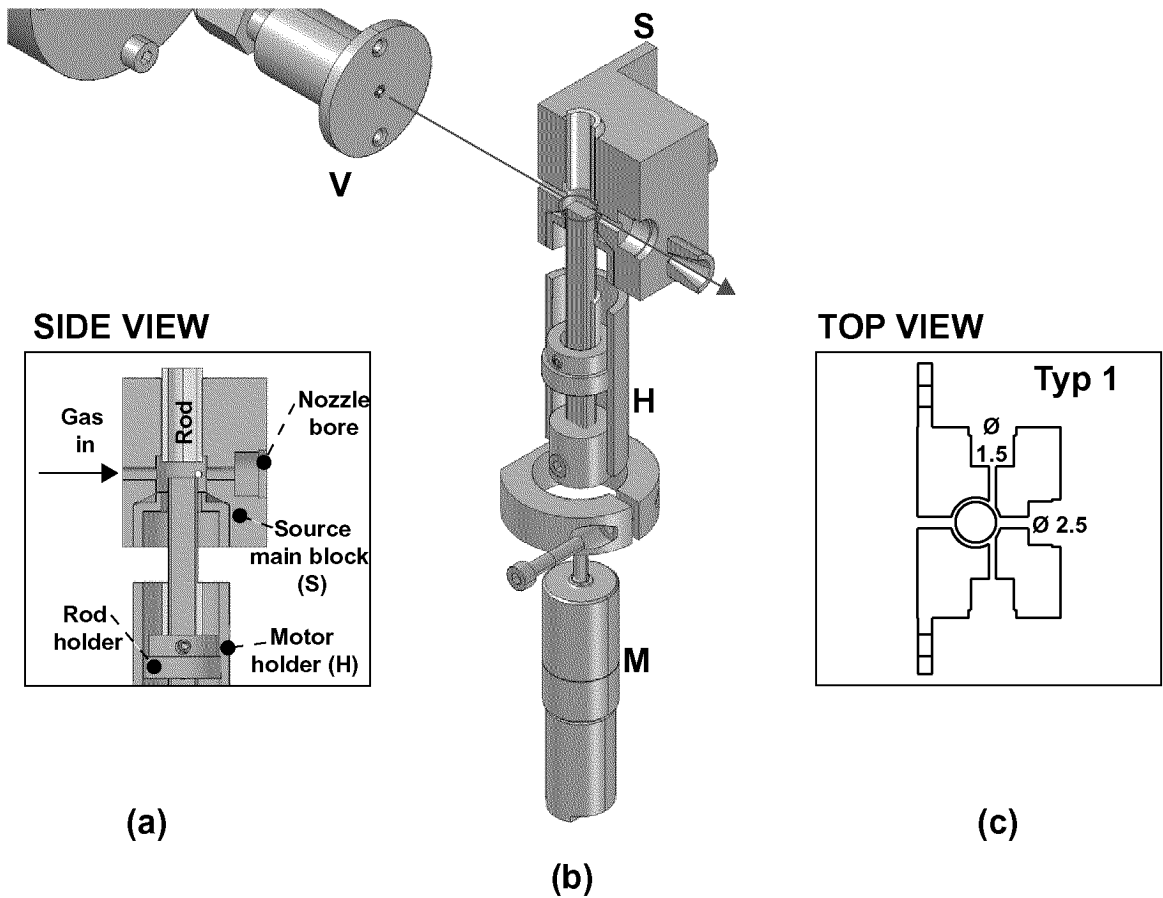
Sketches of the vaporization source with the first design of the main piece (S) (Typ 1). (b) Three dimensional drawing with a cutaway showing a cross section of the vaporization source comprising the main piece (S) and the motor holder (H). The pulsed valve (V) and the mini-motor (M) are also shown. The insets (a) and (c) illustrate respectively a side and a top view (Typ 1) of the vaporization source mid sections.
